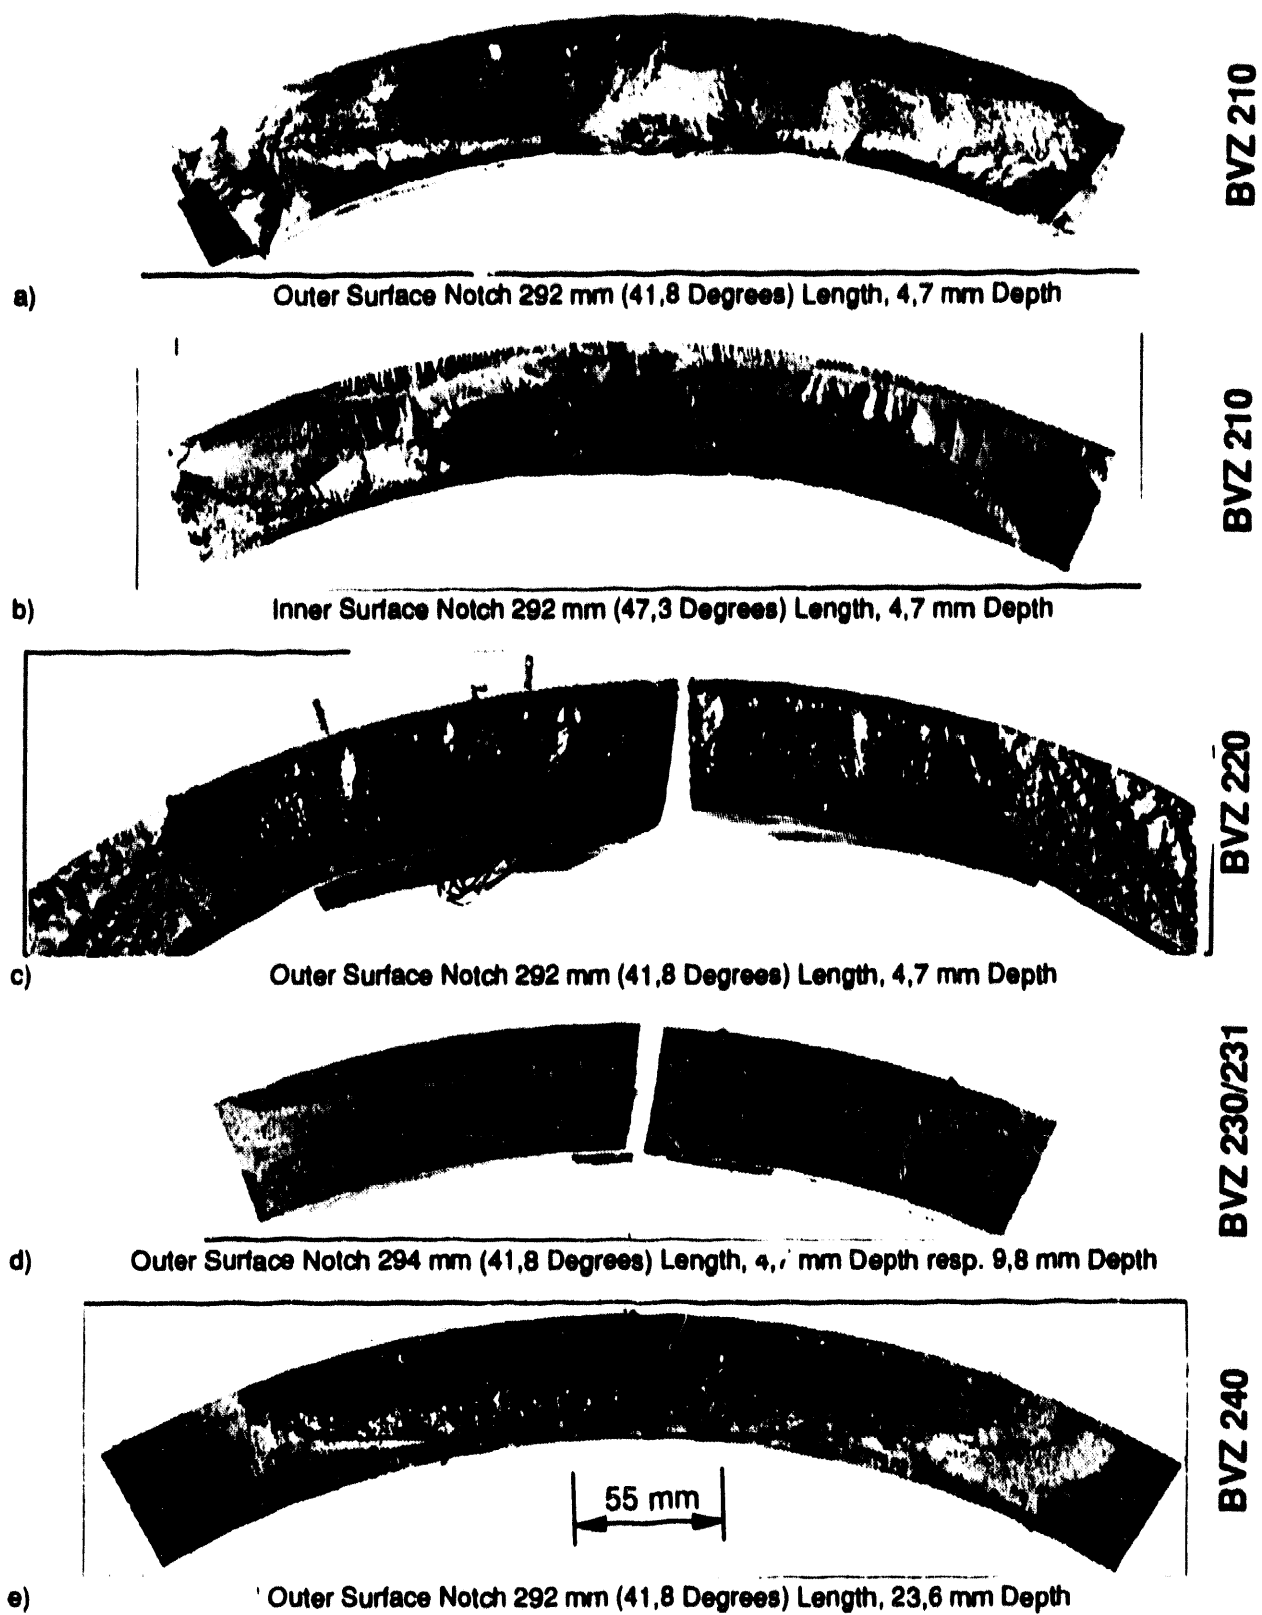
Exposed Fracture Surfaces of Tested Pipes
